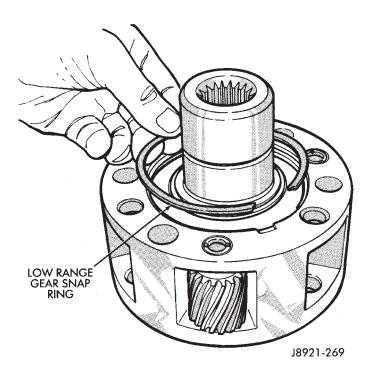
Removing/Installing Low Range Gear Snap Ring
